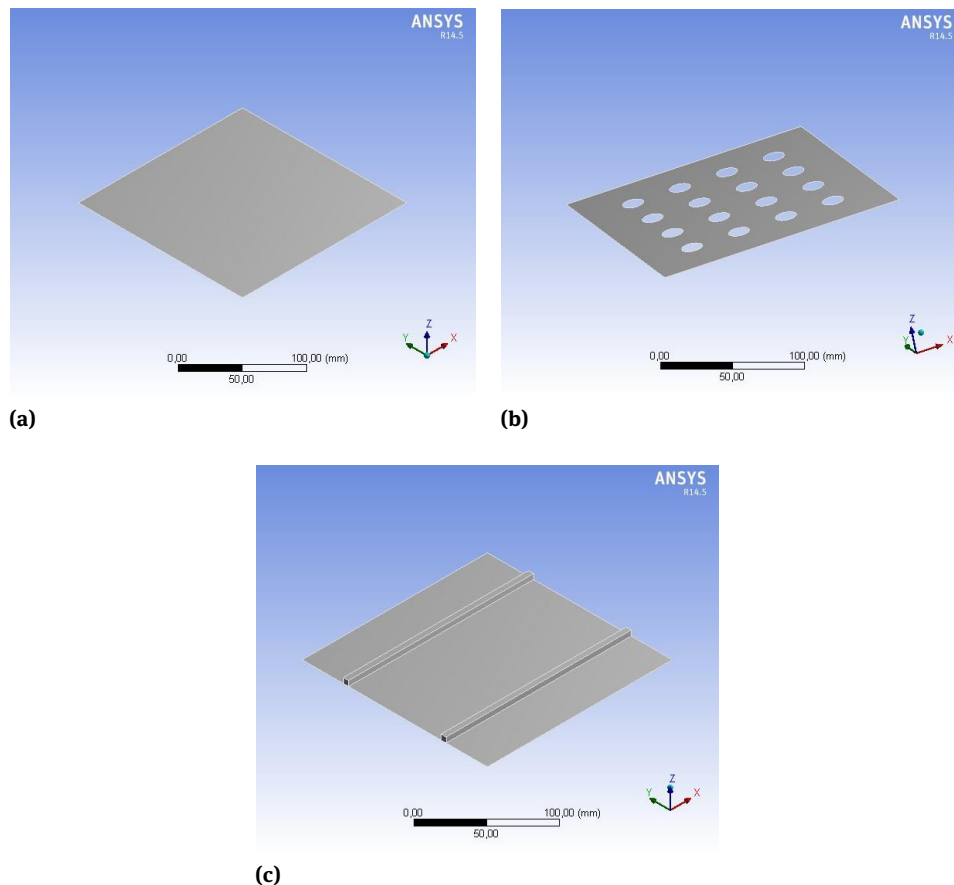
Design sketch model simulation of metal sheet: (a) virgin metal sheet; (b) hole metal sheet; (c) stiffener metal sheet
